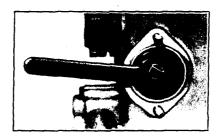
Wrench for Water Pump Drive Shaft Packing
